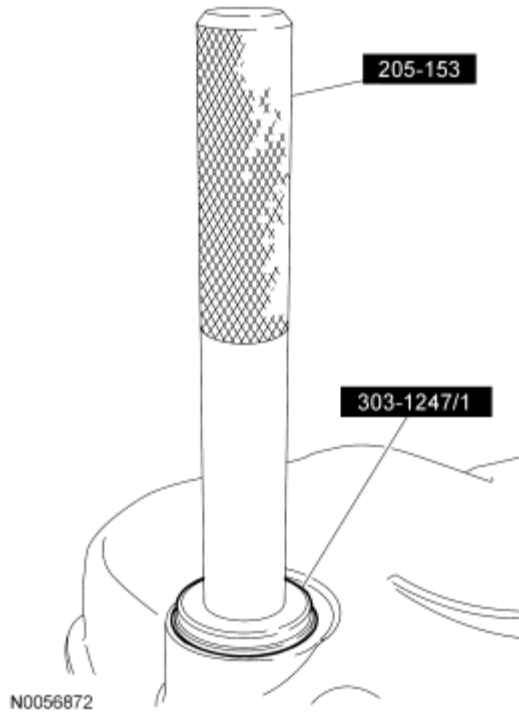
Removing Seals Using Special Tools (205-153) & (303-1247/1)
